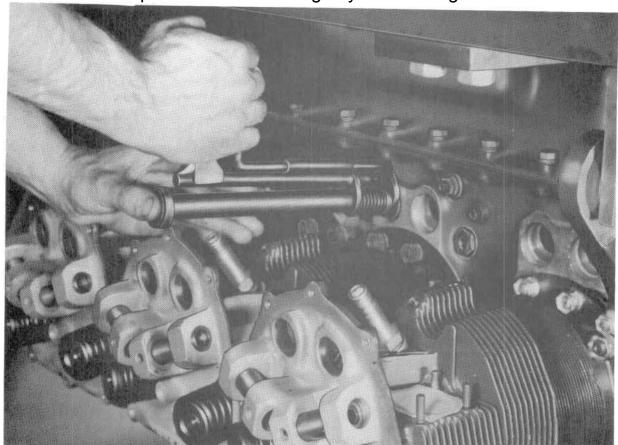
INSTALLING PUSHROD HOUSING.
